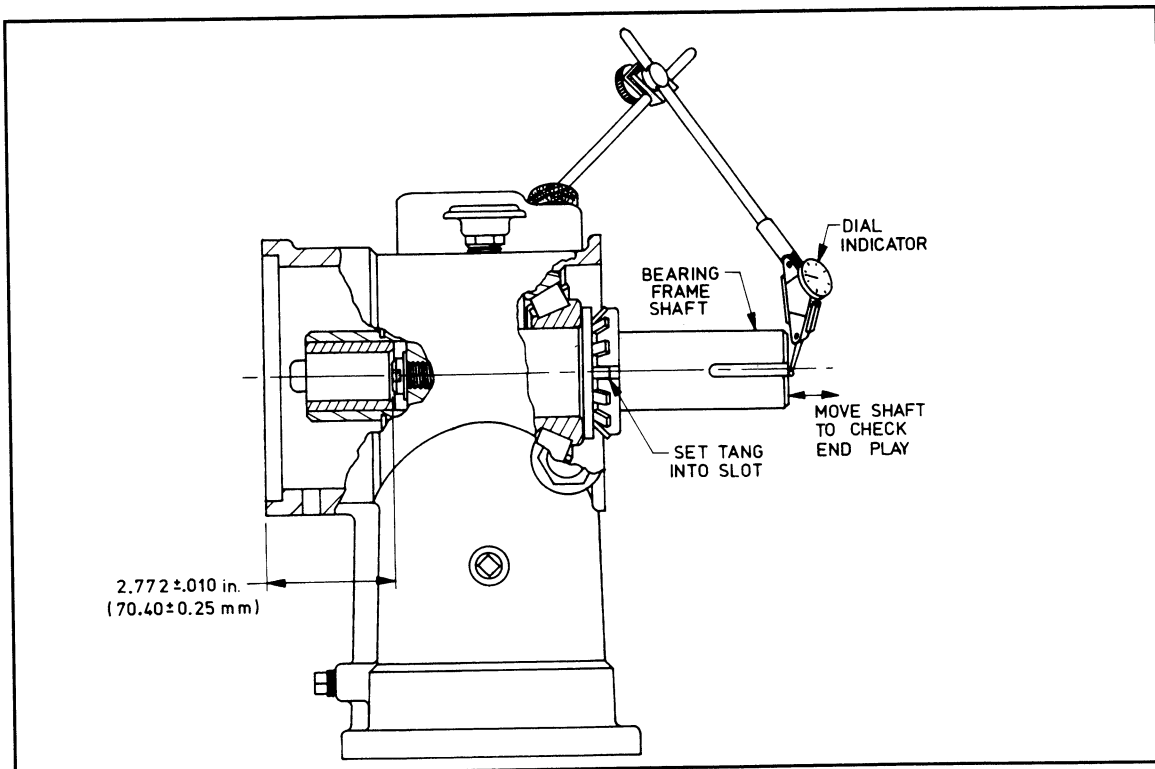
SETTING BEARING FRAME SHAFT END PLAY
